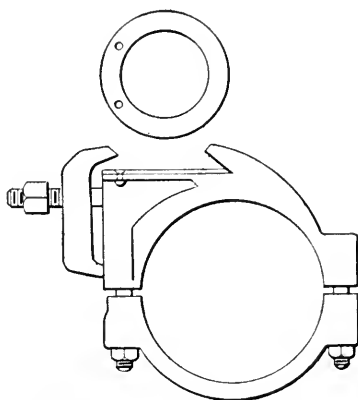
SHIM FOR WORN MACHINE-DRILL CLAMPS.
